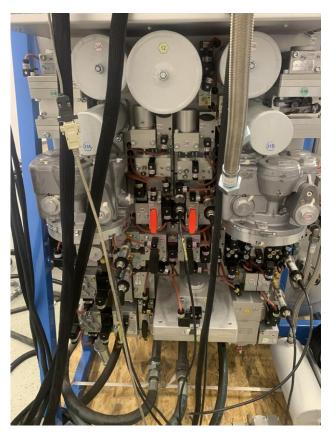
Pneumatic board 200ZH 94-1 during acceptance [own drawing courtesy of PIT-Industry]
